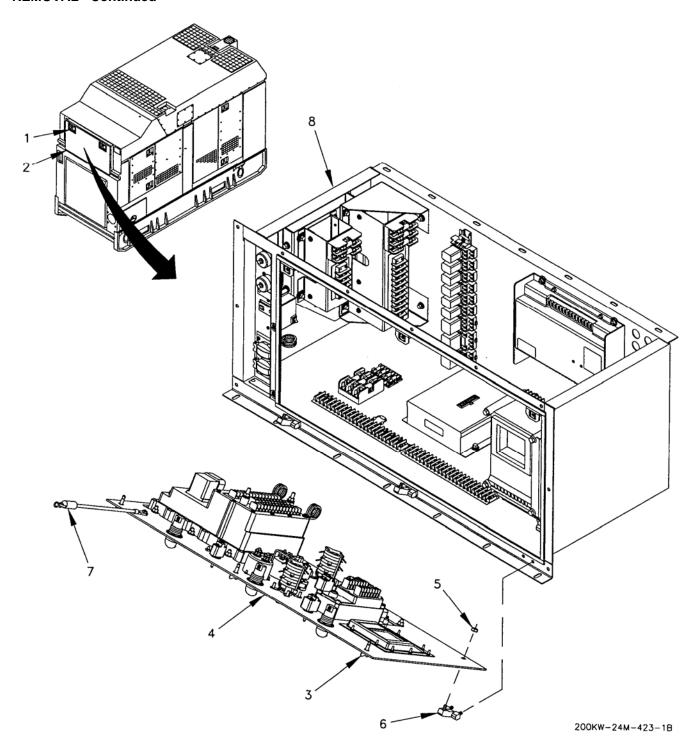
Control Box Panel Assembly (Sheet 1 of 4).
